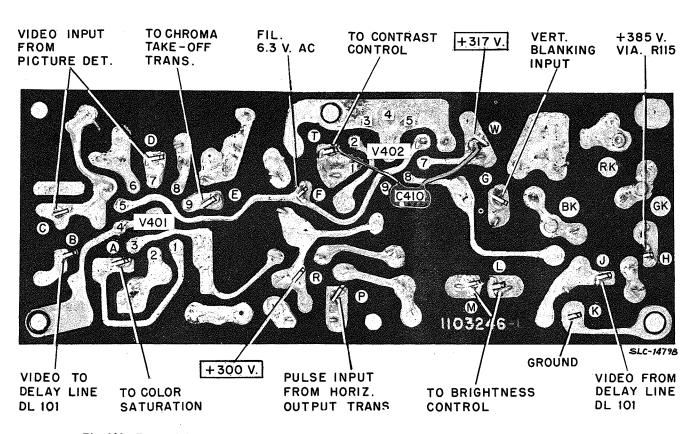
Bottom View, Printed Circuit Board PW-400, 1st and 2nd Video, Horizontal Blanking—CTC5.
